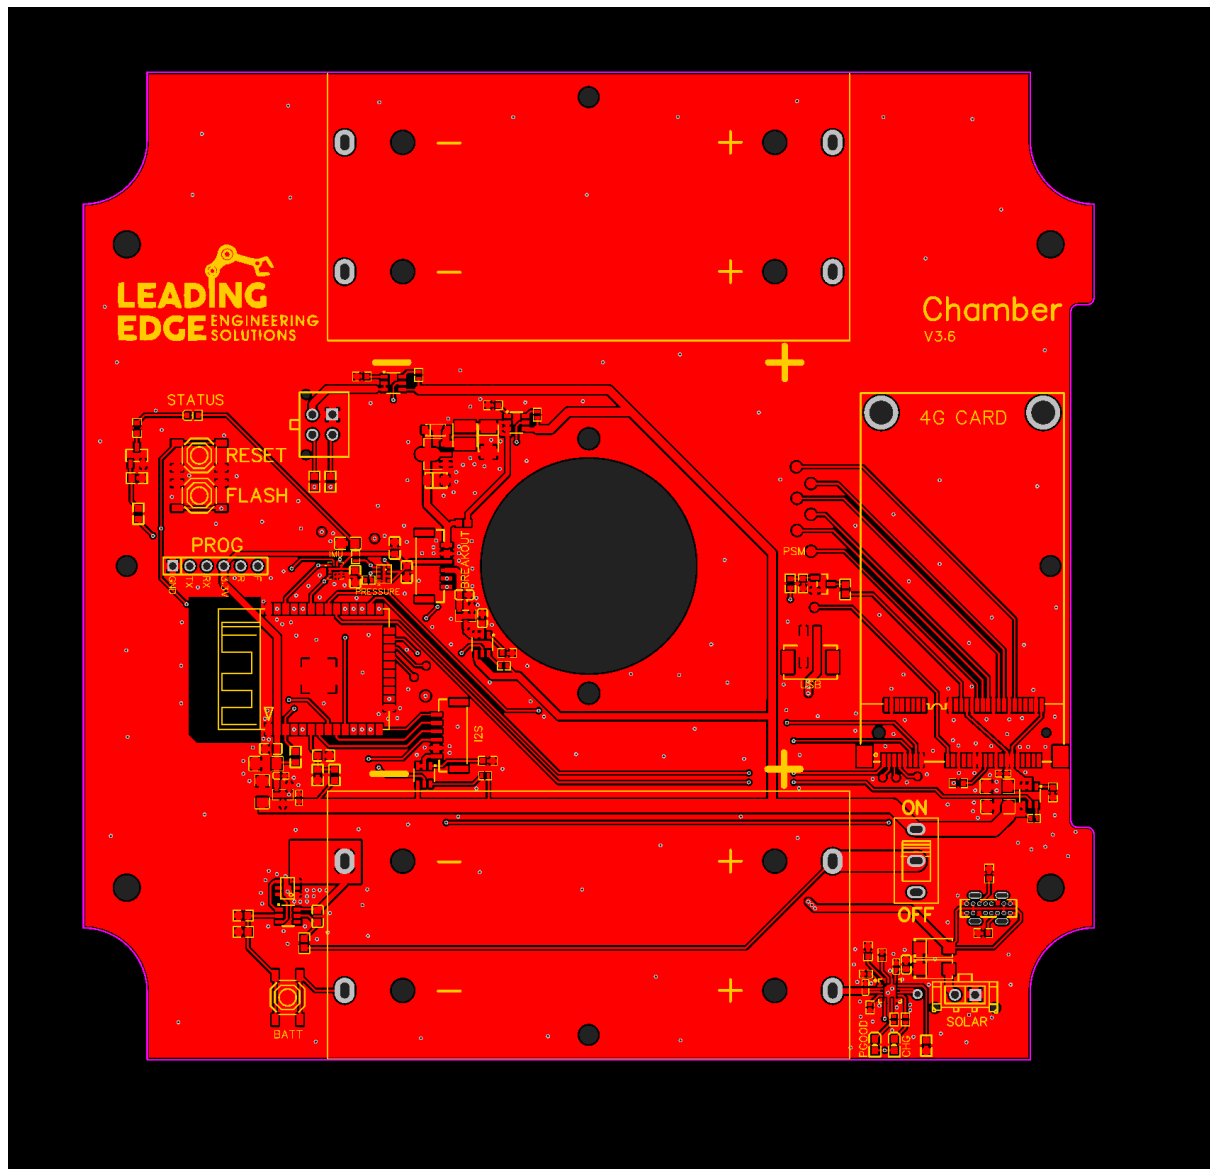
Top view of the custom *Pondi* PCB. All components are mounted on this top surface only. Gerber files for the PCB are available upon request.
